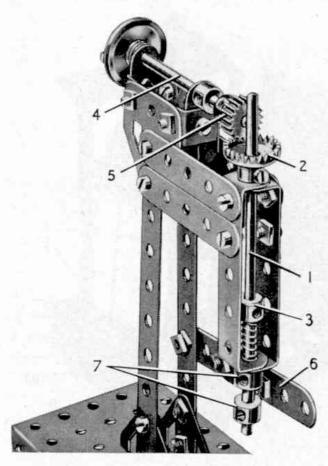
An application of the Rod with Keyway to form the drill spindle of a model drilling machine. By its use the spindle is free to rise and fall without interruption to the drive.
